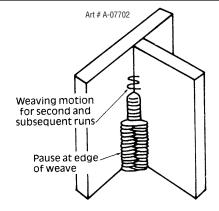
Multi Run Vertical Fillet Weld
